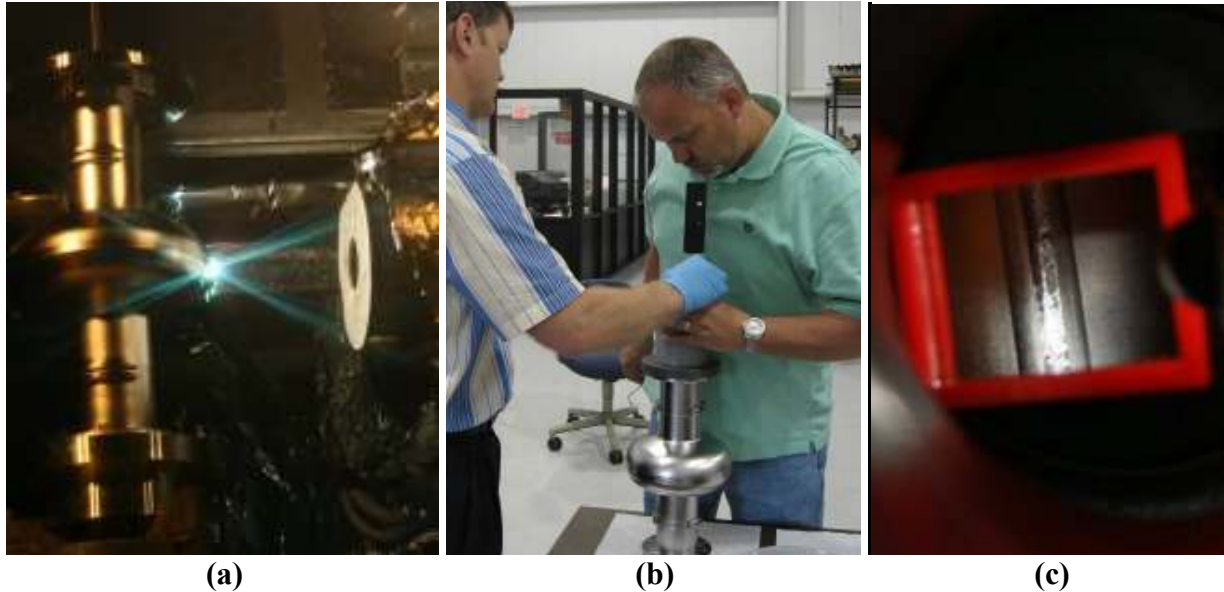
(a) full penetration equator weld; (b) inside equator weld inspection; (c) inside equator weld bead
